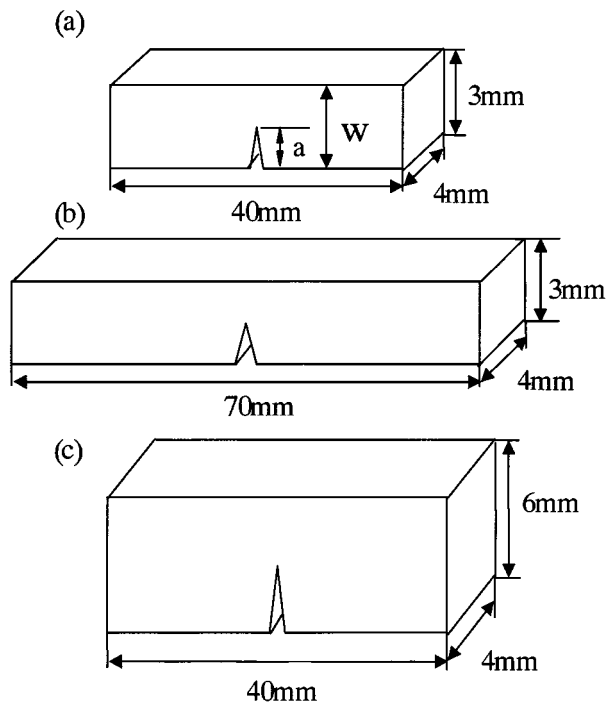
Dimensions of specimens for modal fracture energy measurement: (a) type A; (b) type B, and (c) type C.
